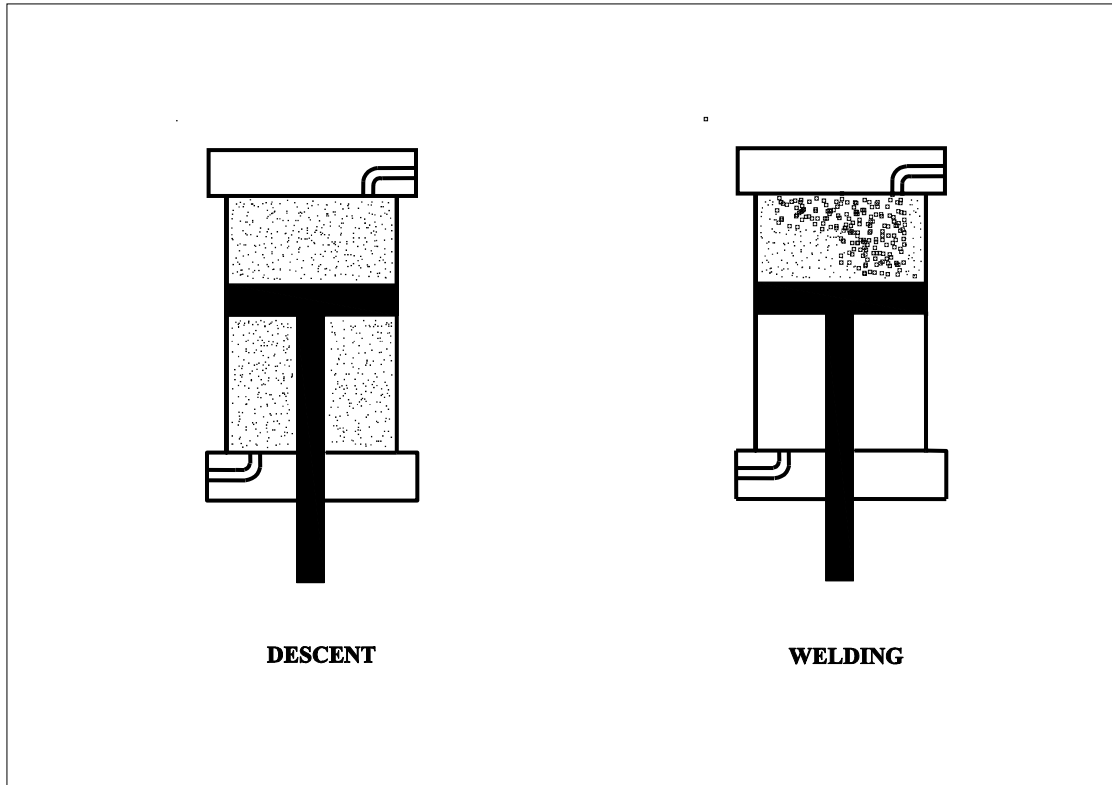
Low force head descent in pneumatic TECNA machine
